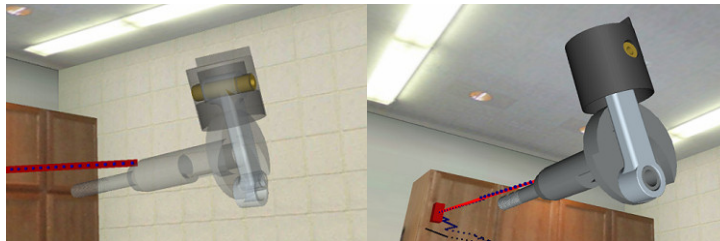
(left): Crankshaft is being manually attached to piston assembly in a virtual demonstration, Fig. 10 (right): Automatically adjusted placement of crankshaft after motion smoothening.
